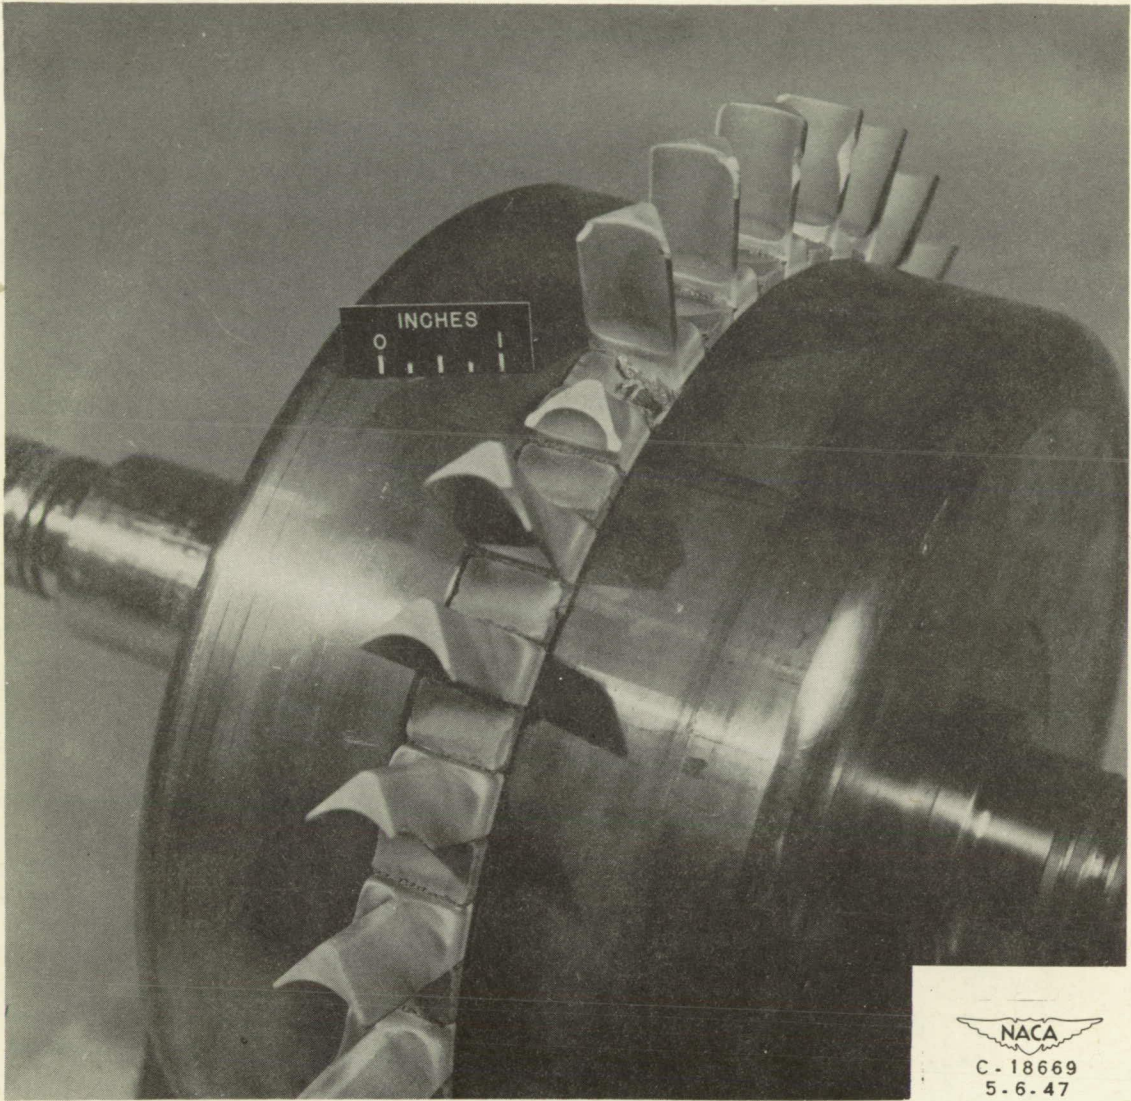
View from exhaust side of ceramic-bladed turbine after shutdown caused by broken spacer. Blade-ring assembly 2.
